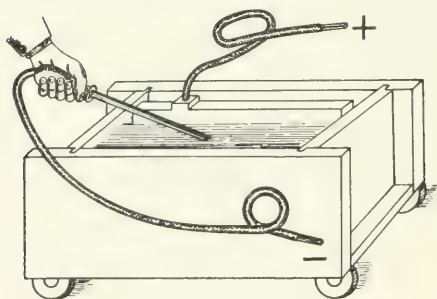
THE LA GRANGE-HOHO WELDING PROCESS
